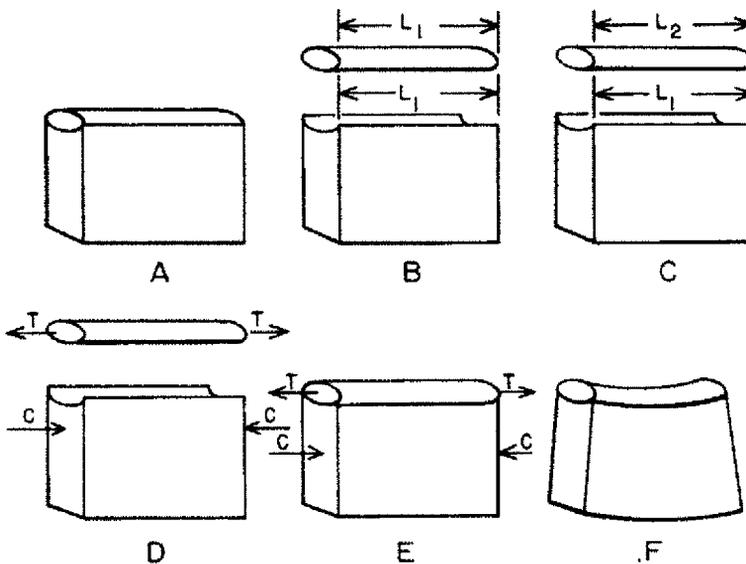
Schematic drawing showing why residual stresses exist in welds and their effect in causing weld distortion.
